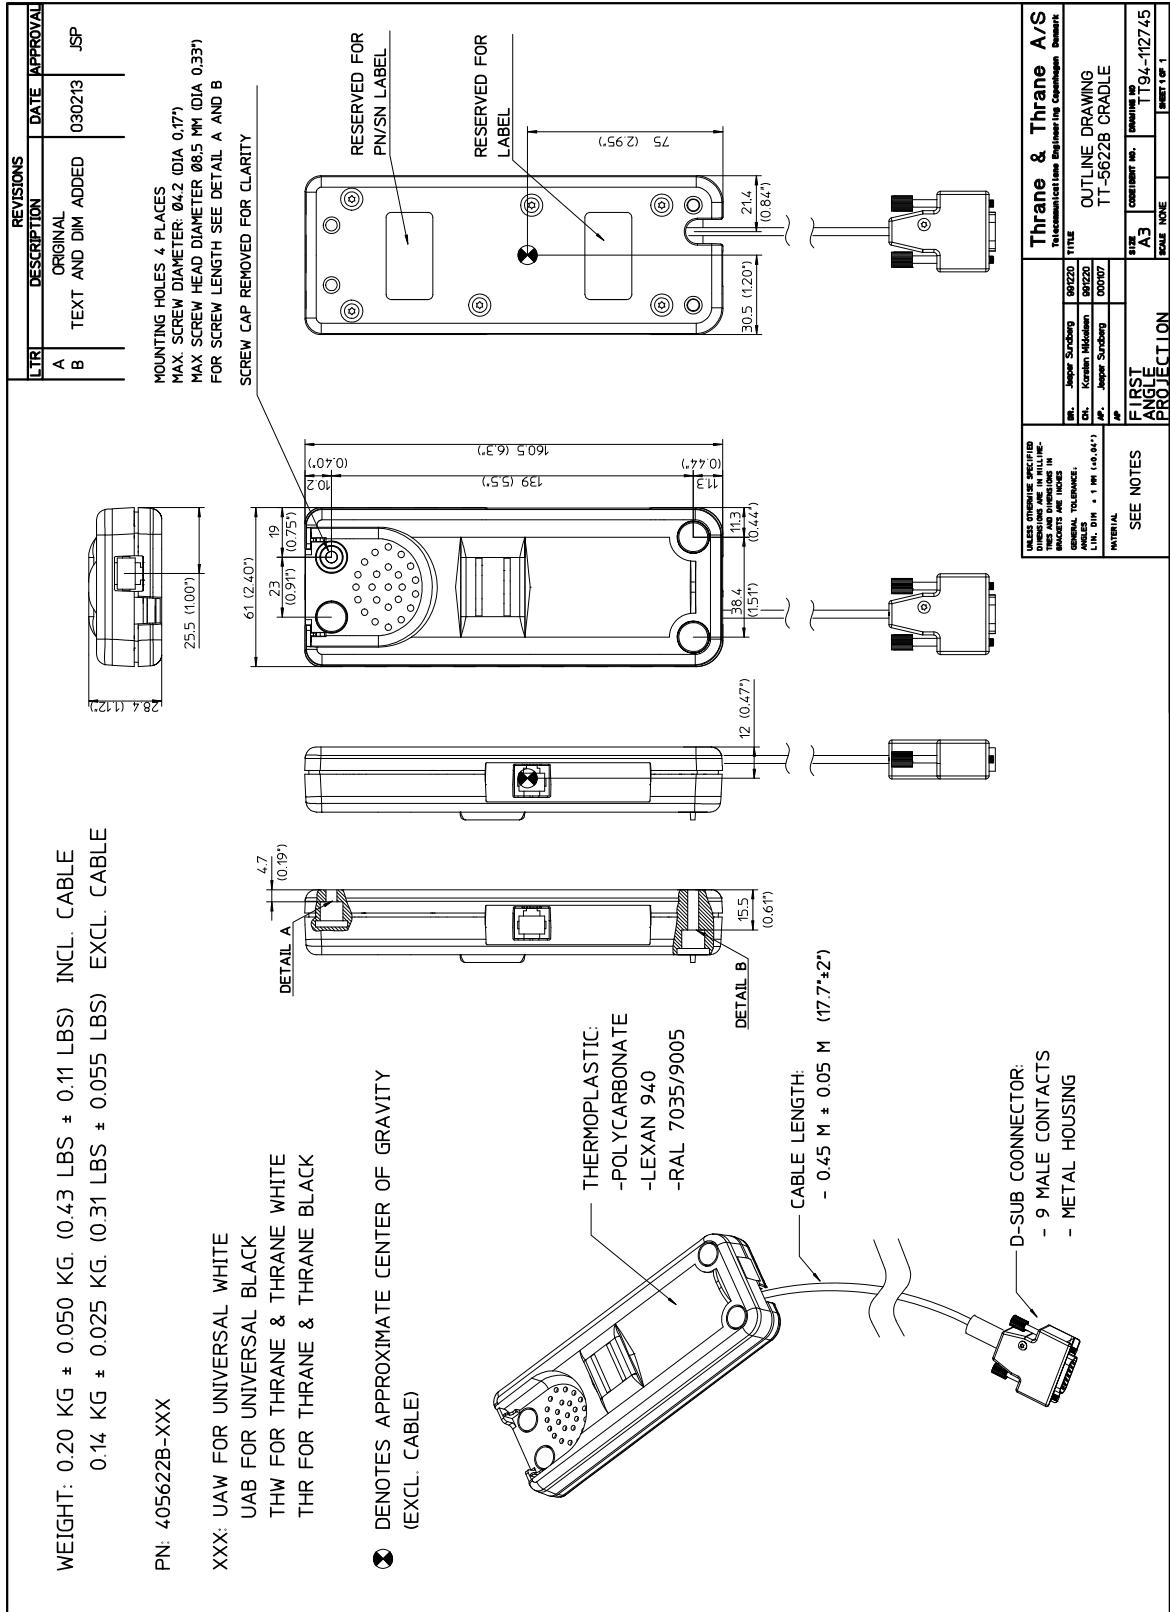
Outline drawing: TT-5622B 2-Wire Cradle
